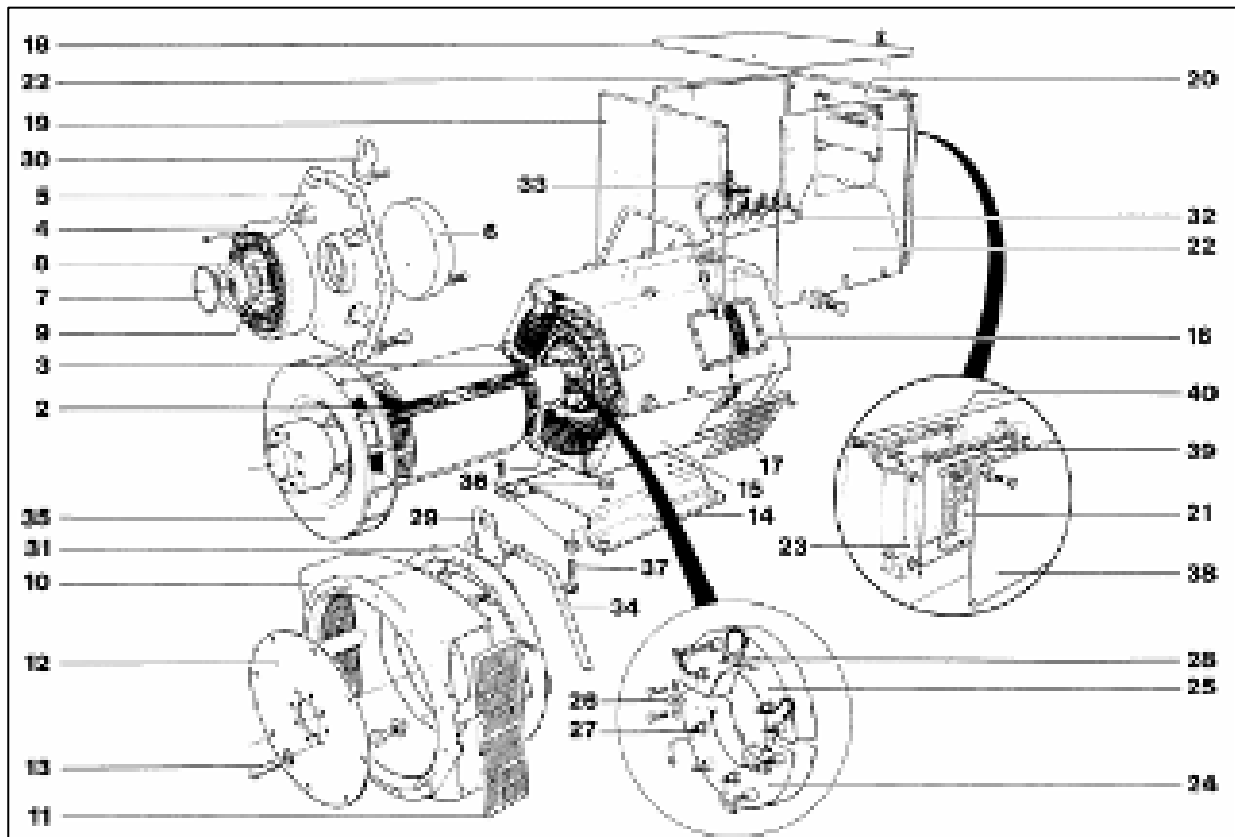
Typical Single Bearing Generator / Alternator Exploded View
